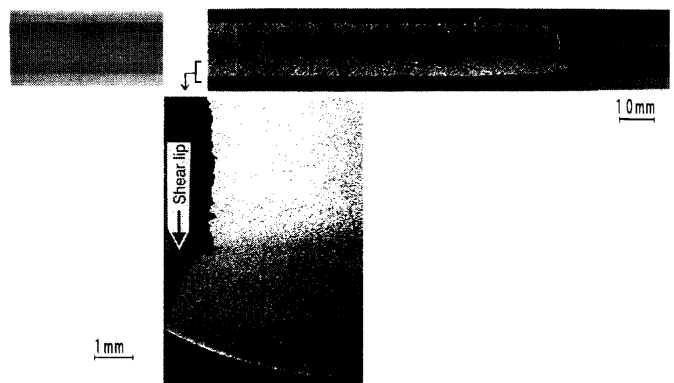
Fracture surface and its cross section of ESSO test piece.
